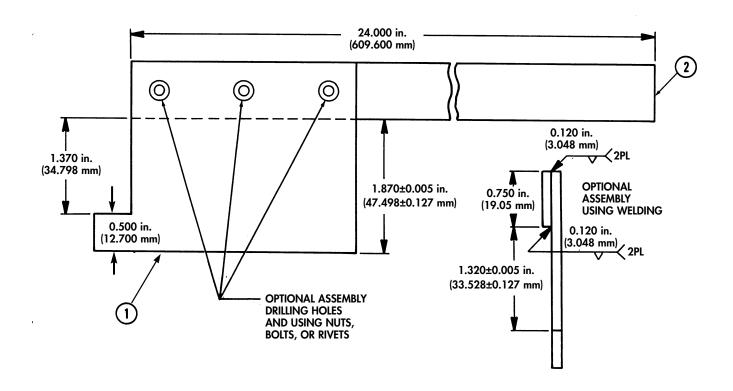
Pulley Alignment Tool Fabrication (Cont'd).
